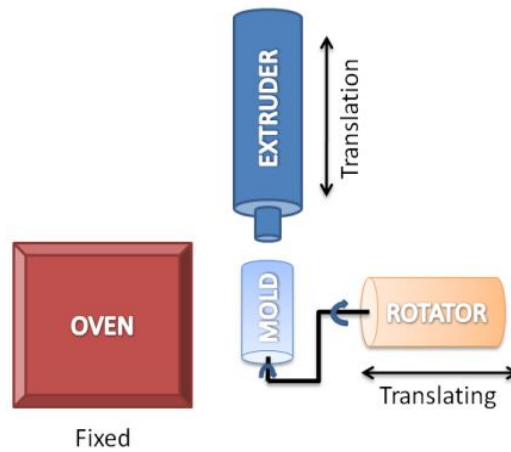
Processing Concept 1 – translating extruder and arm-mold assembly, fixed oven
